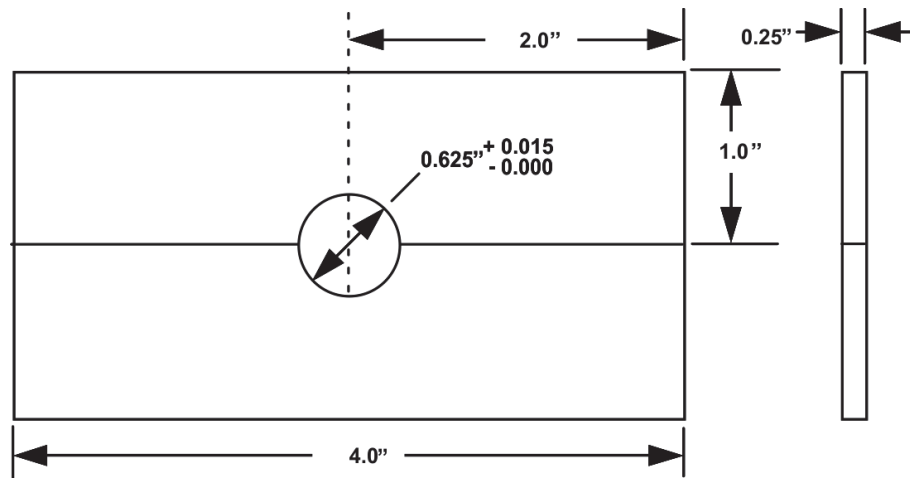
Fabricated Support Bars (Cold Rolled Steel) - Small Gear
